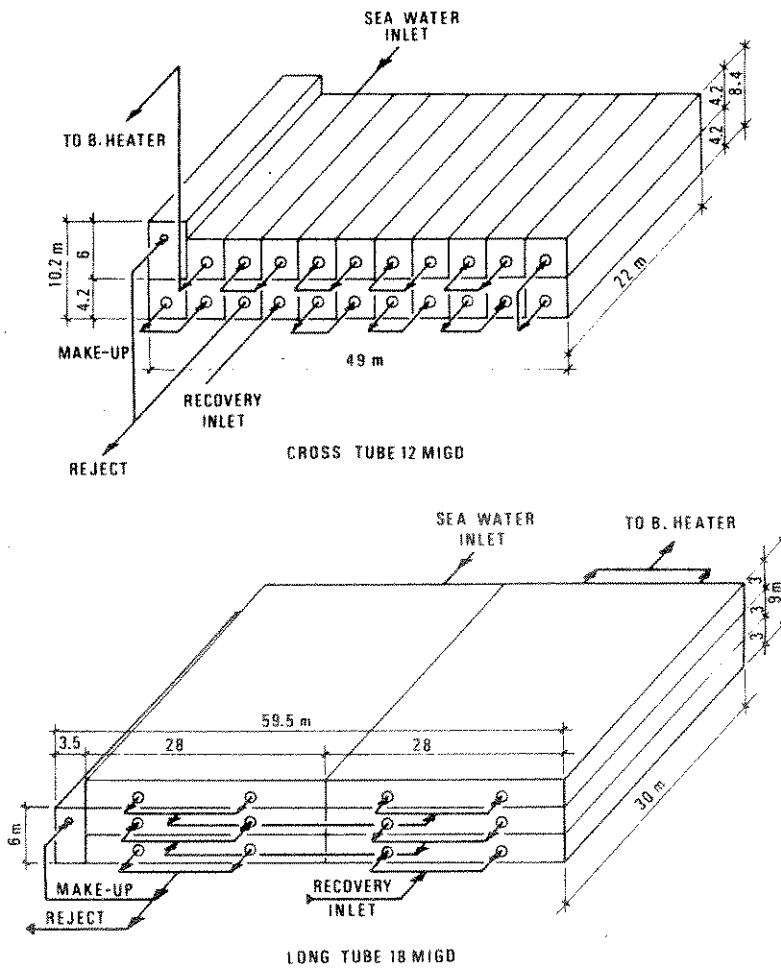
Schematic general assembly of cross and long tube evaporators.
